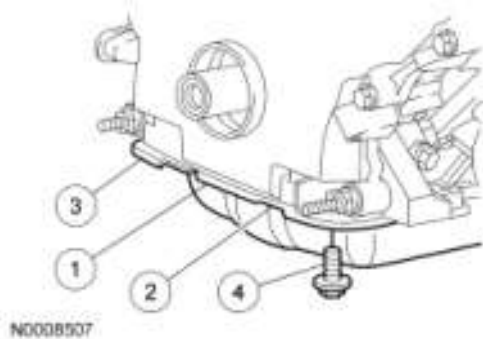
Identifying Tightening Sequence Of Front Oil Pan Bolts
